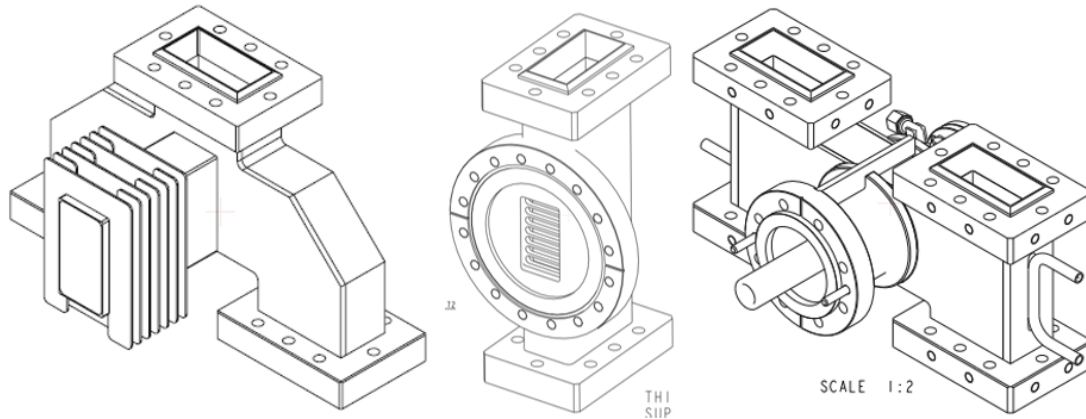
Magic tee, pumping waveguide section and H-coupler with coaxial doorknob.
